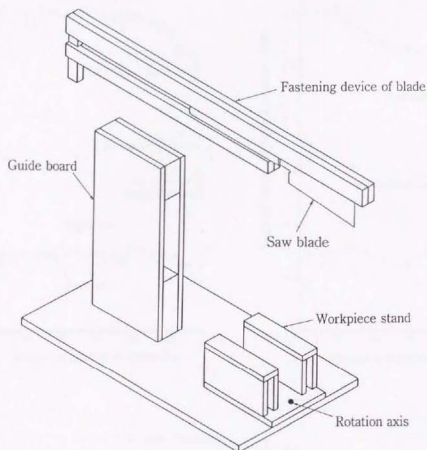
Device for sawing which enables a workpiece to rotate.
